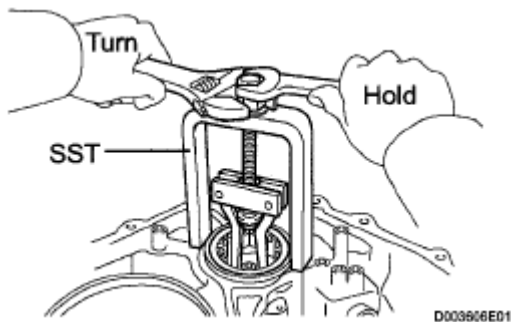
Removing Underdrive Cylindrical Roller Bearing
